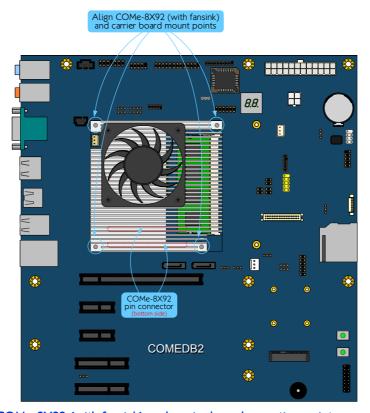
Aligning COMe-8X92 (with fansink) and carrier board mounting points
